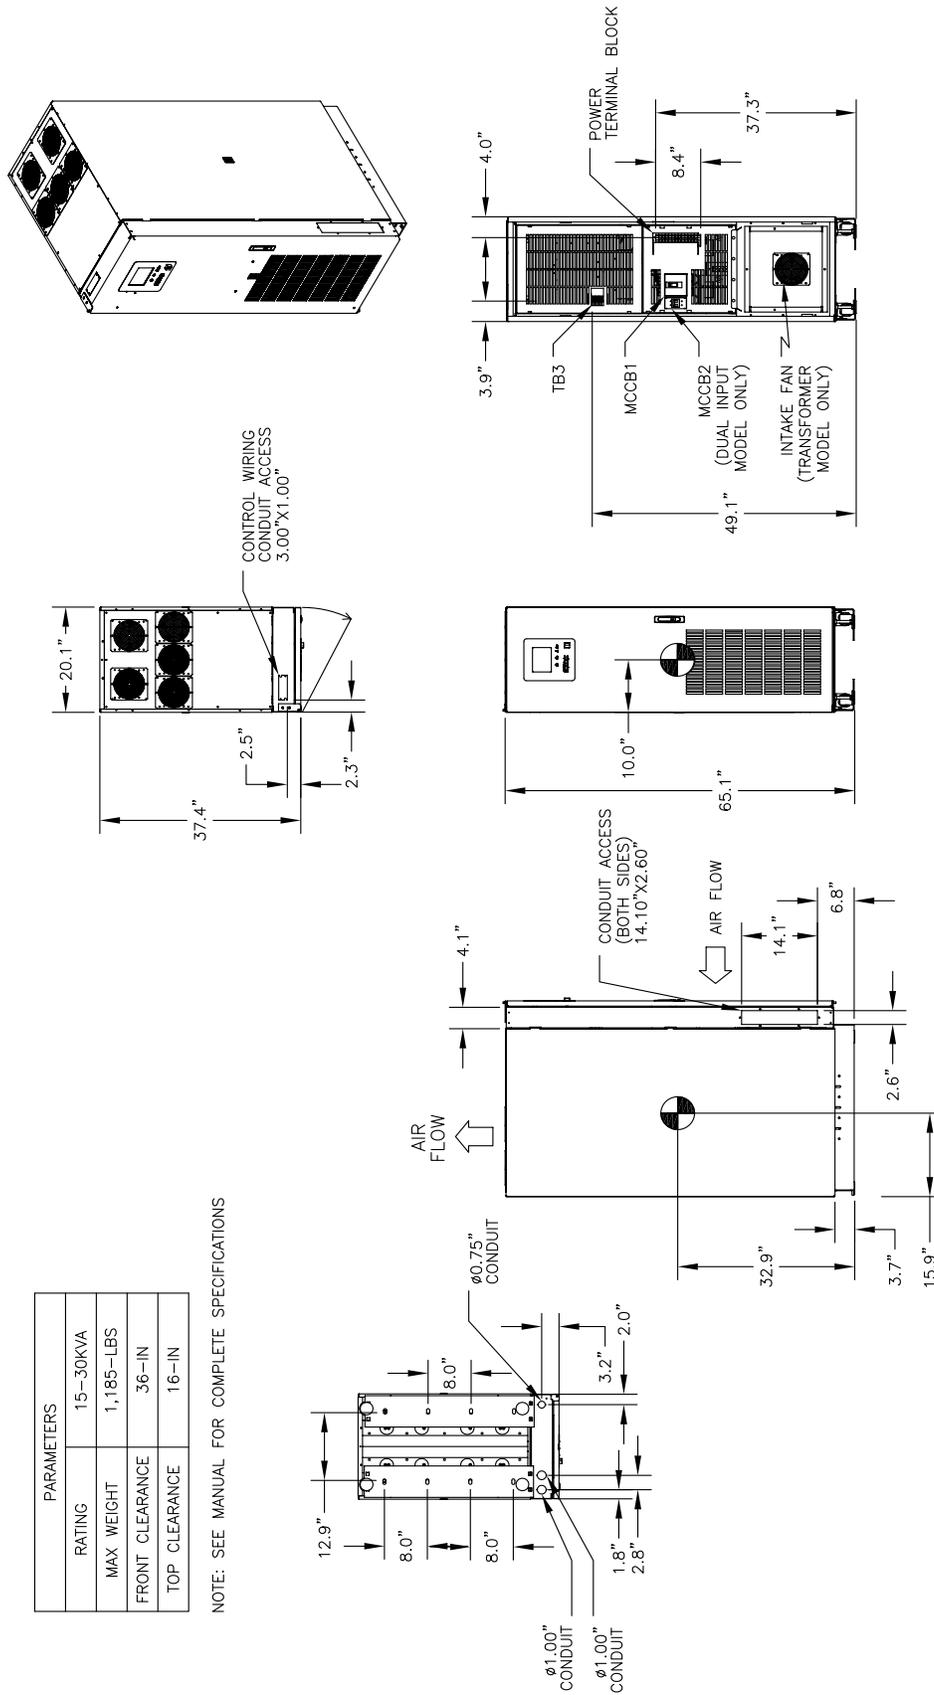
4400 15-30 KVA PHYSICAL DIMENSIONS
